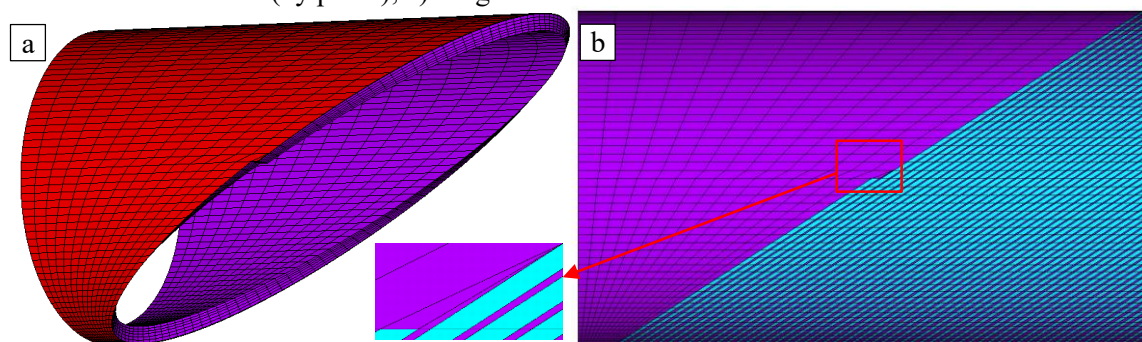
a) 3D view of the former end; b) Transition between the coil and the end of the former.
